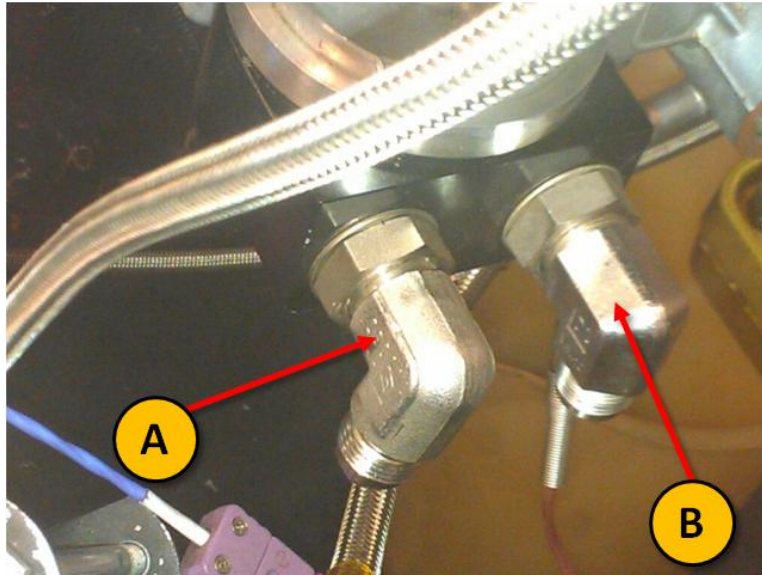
Engine-mounted oil filter housing adapter return to engine (A) and supply to oil filter (B) line connections
